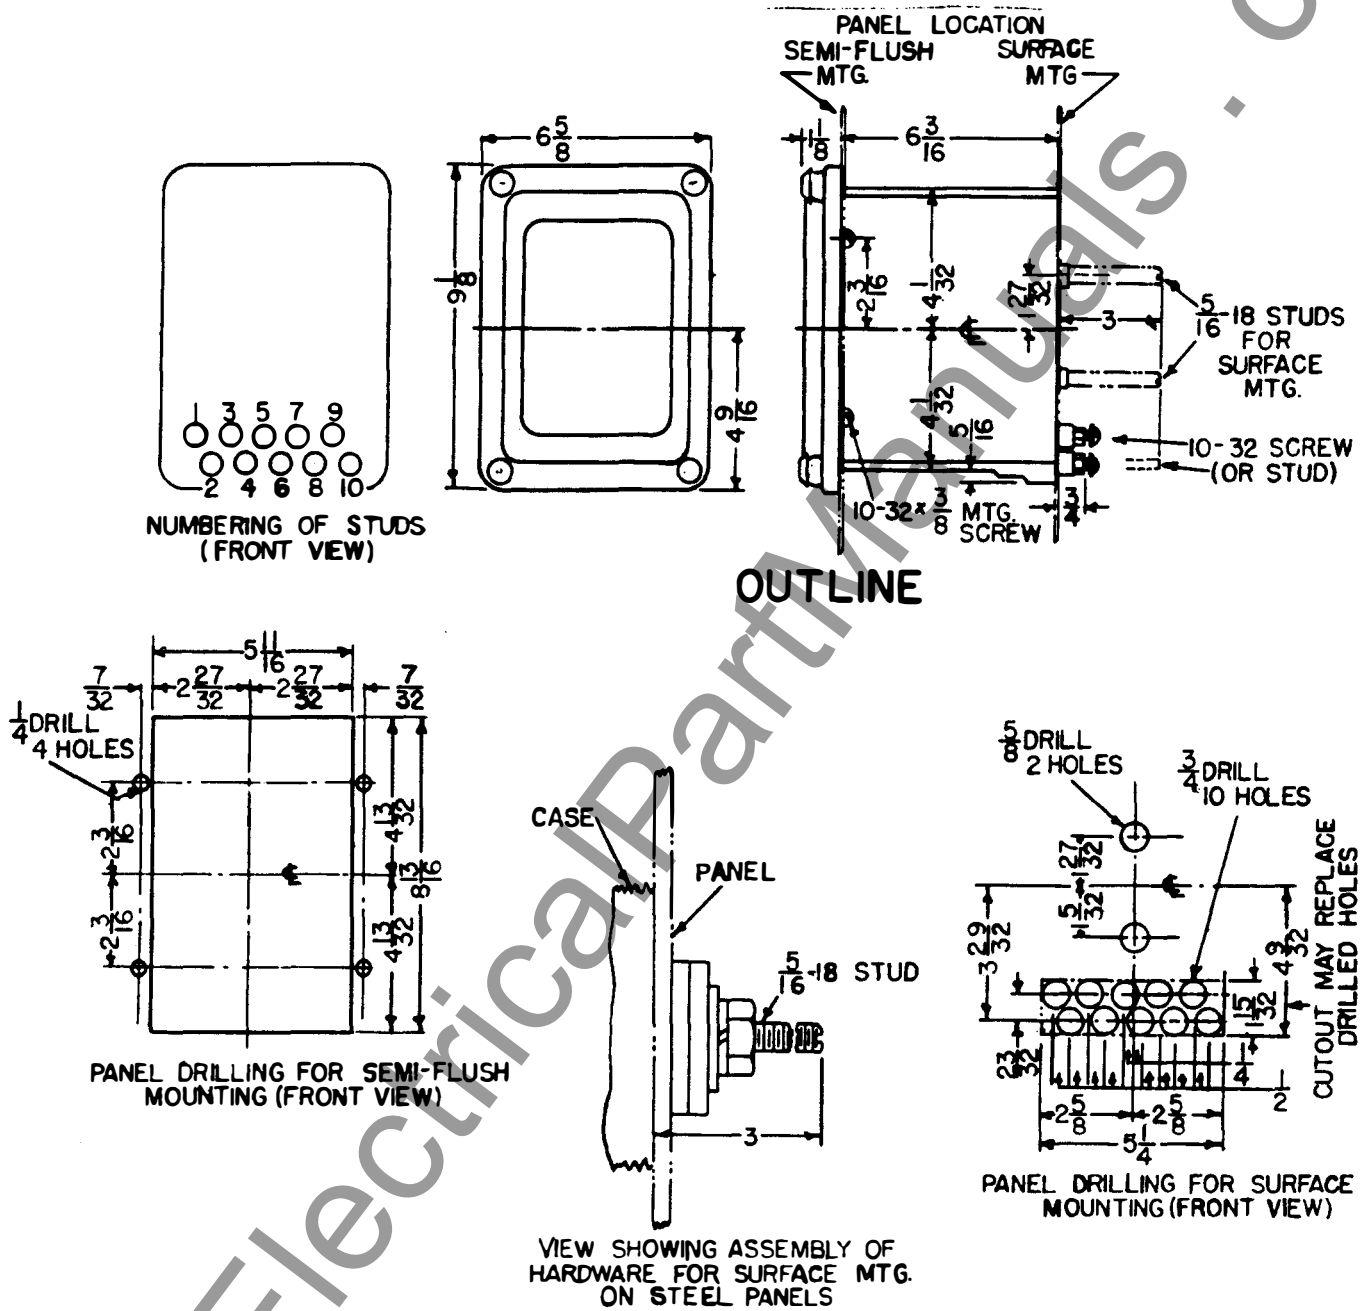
Outline And Panel Drilling Dimensions For Type ICW Relays
